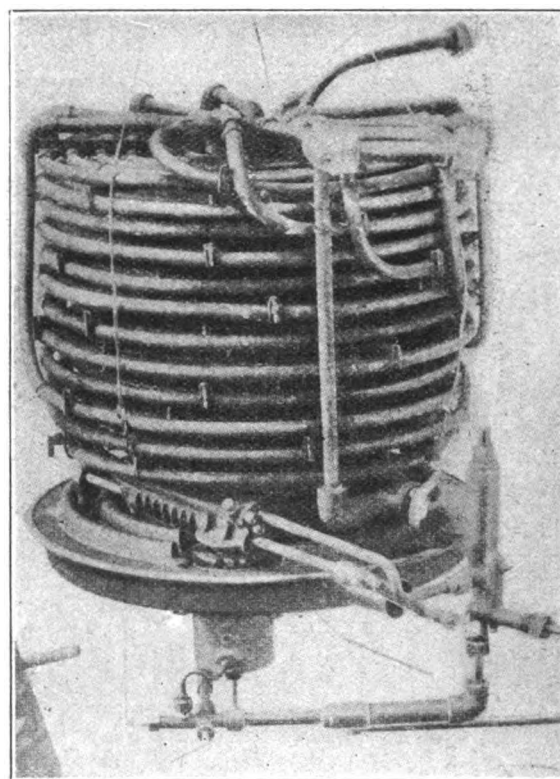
THE WHITE STEAM GENERATOR, WITH CASING REMOVED.
